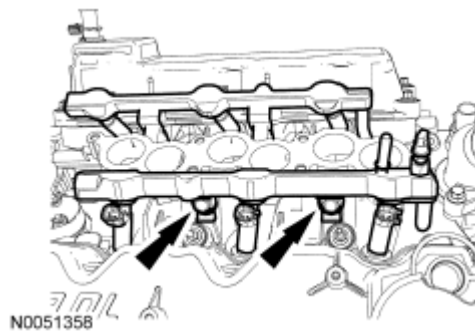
Locating O-Ring Seals & Fuel Injectors
